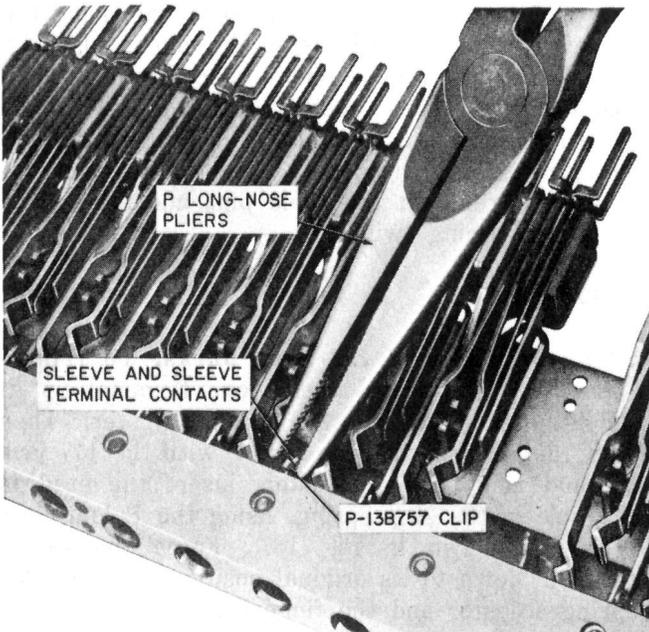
Method of Fastening P-13B757 Clip to the Contacts of the Sleeve and Sleeve Terminal on 510-, 511-, and 512-Type Jacks
